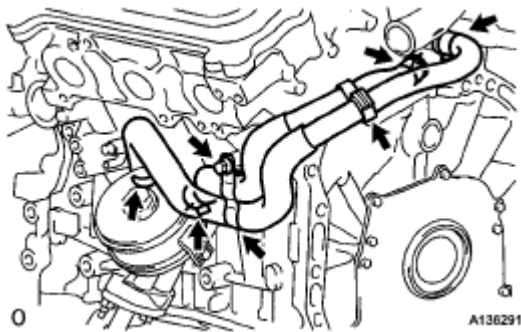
Identifying Water By-Pass Hoses Bolt, Clamps & Clips
